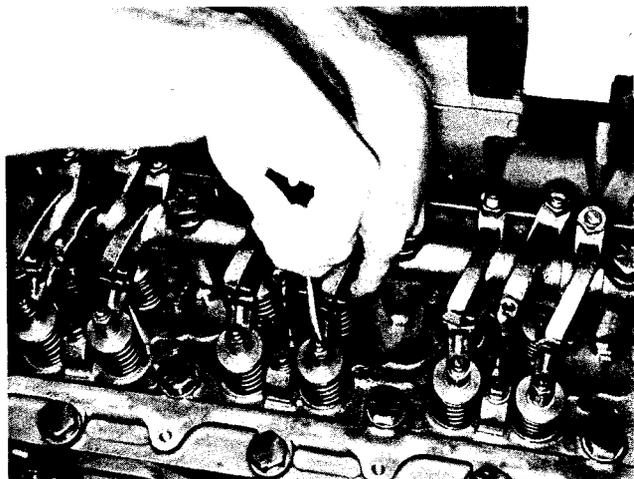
, (V51490). Adjusting crossheads — V-903
